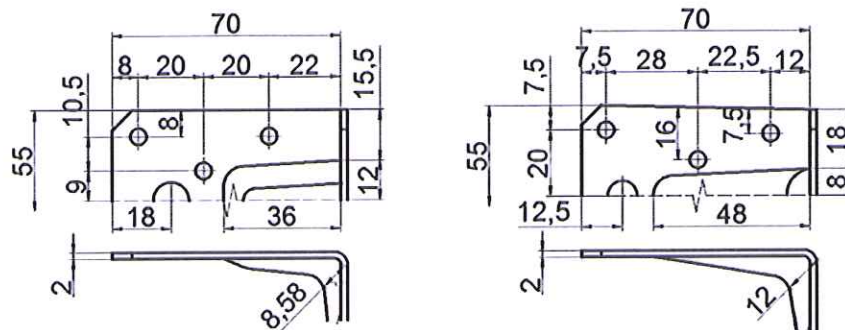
Angle brackets dimensions in millimetres (left – original version, right – improved version)
